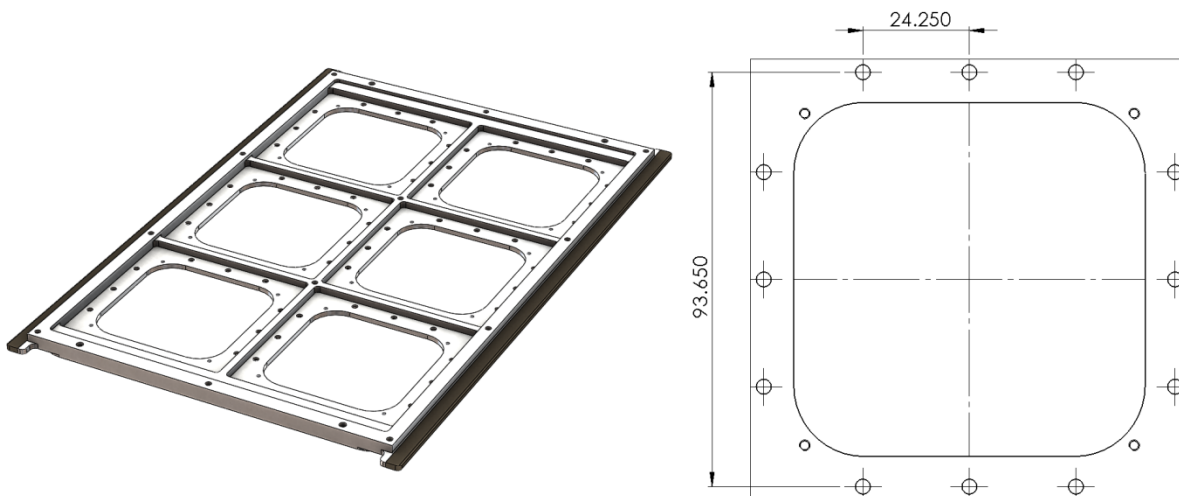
CELL LAYOUT & MOUNTING HOLE PATTERN
